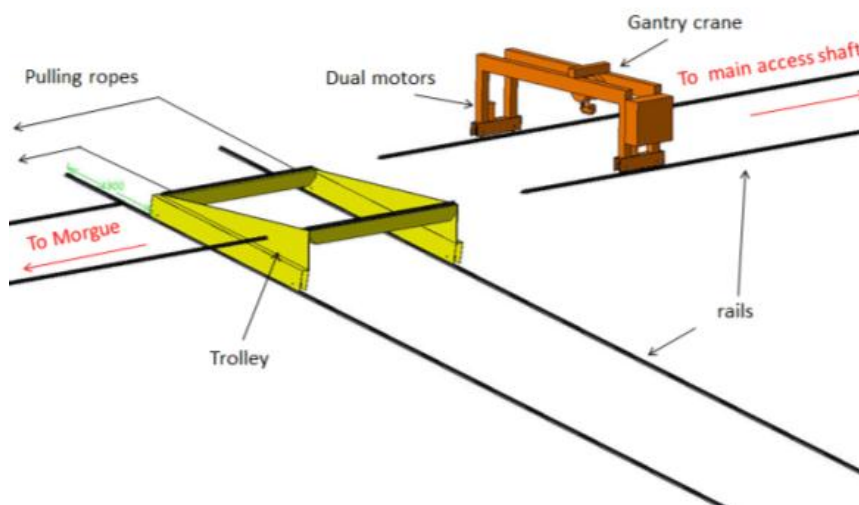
Detail of the layout and coupling of the gantry crane to the travelling trolley.
